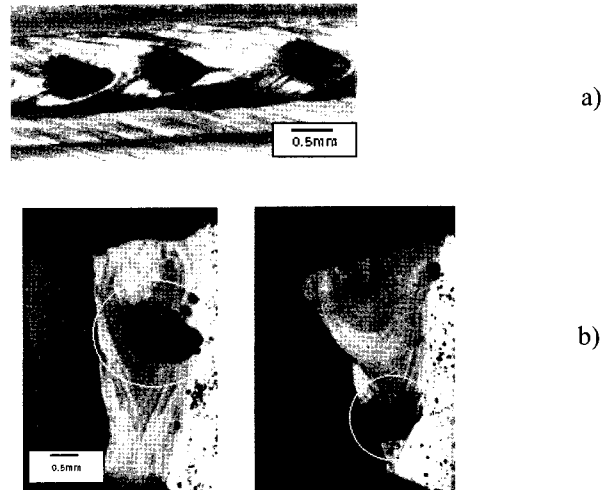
Outer a), Inner b) cavities in cross section of weld
